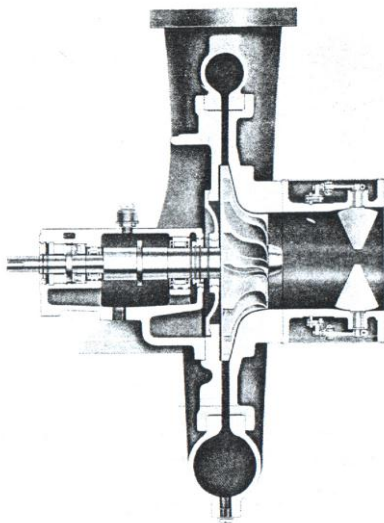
Cutaway of the single-stage centrifugal compressor. Photo courtesy of Roots Operations, Dresser Industries, Inc., Connersville, IN.
